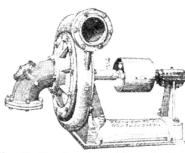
Exterior view of Byron-Jackson Centrifugal Pump, horizontal single side suction type.
